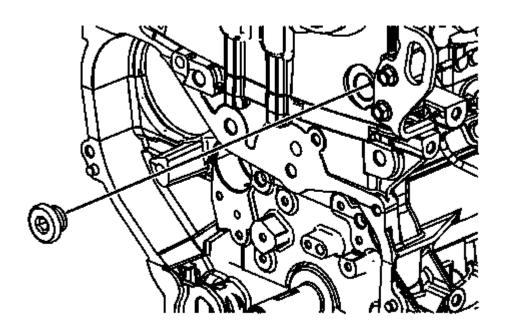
Timing Chain Guide Bolt Access Hole Plug Courtesy of GENERAL MOTORS COMPANY
